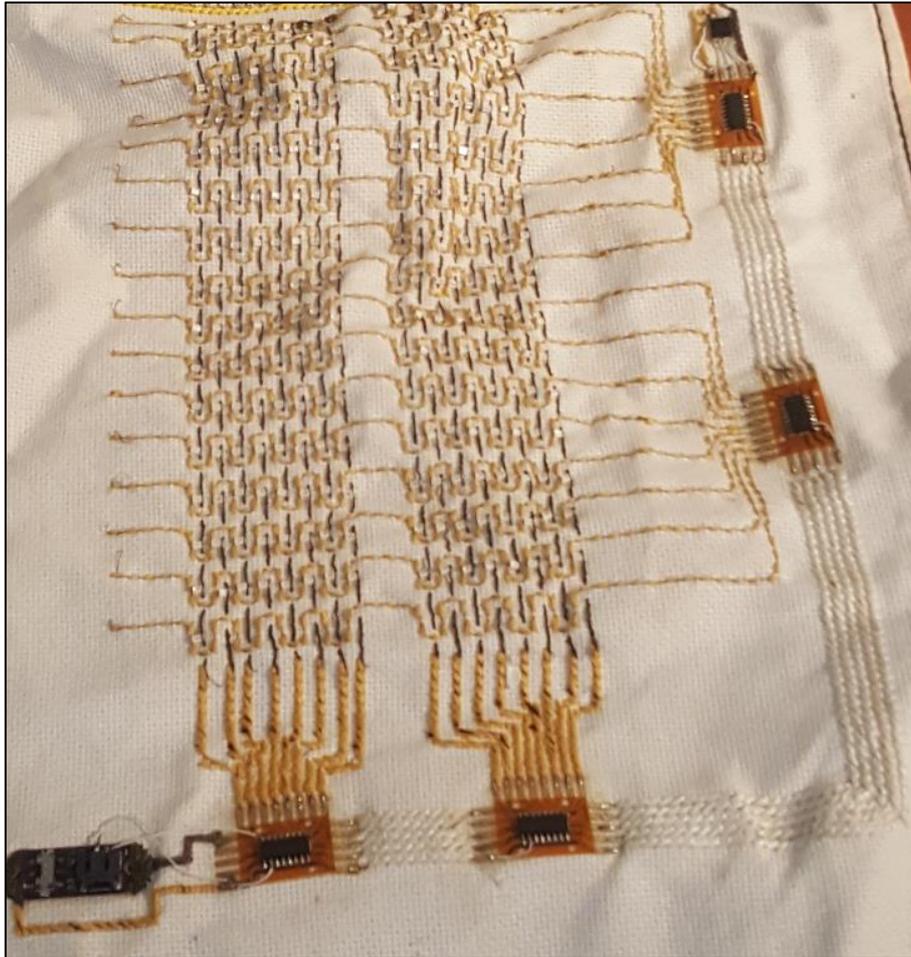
Thread connections between film circuit boards, rigid circuit board (power supply connector), and LEDs
